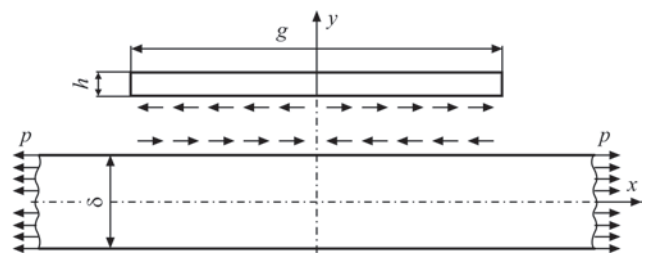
Scheme of loading of separate parts of model of butt welded joint with rectangular projection
